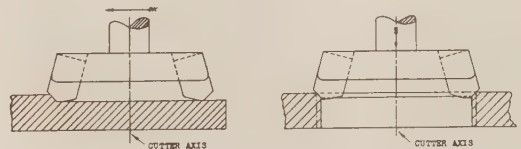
SIMILARITY OF CUTTING ACTION OF A FACE MILL AND A MACHINE REAMER
